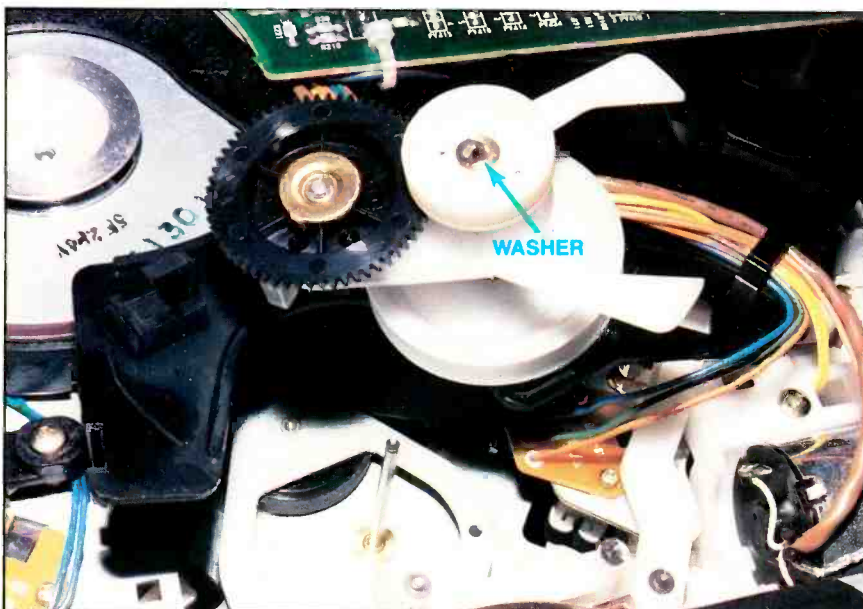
Be careful not to lose the washer under the idler gear assembly.
